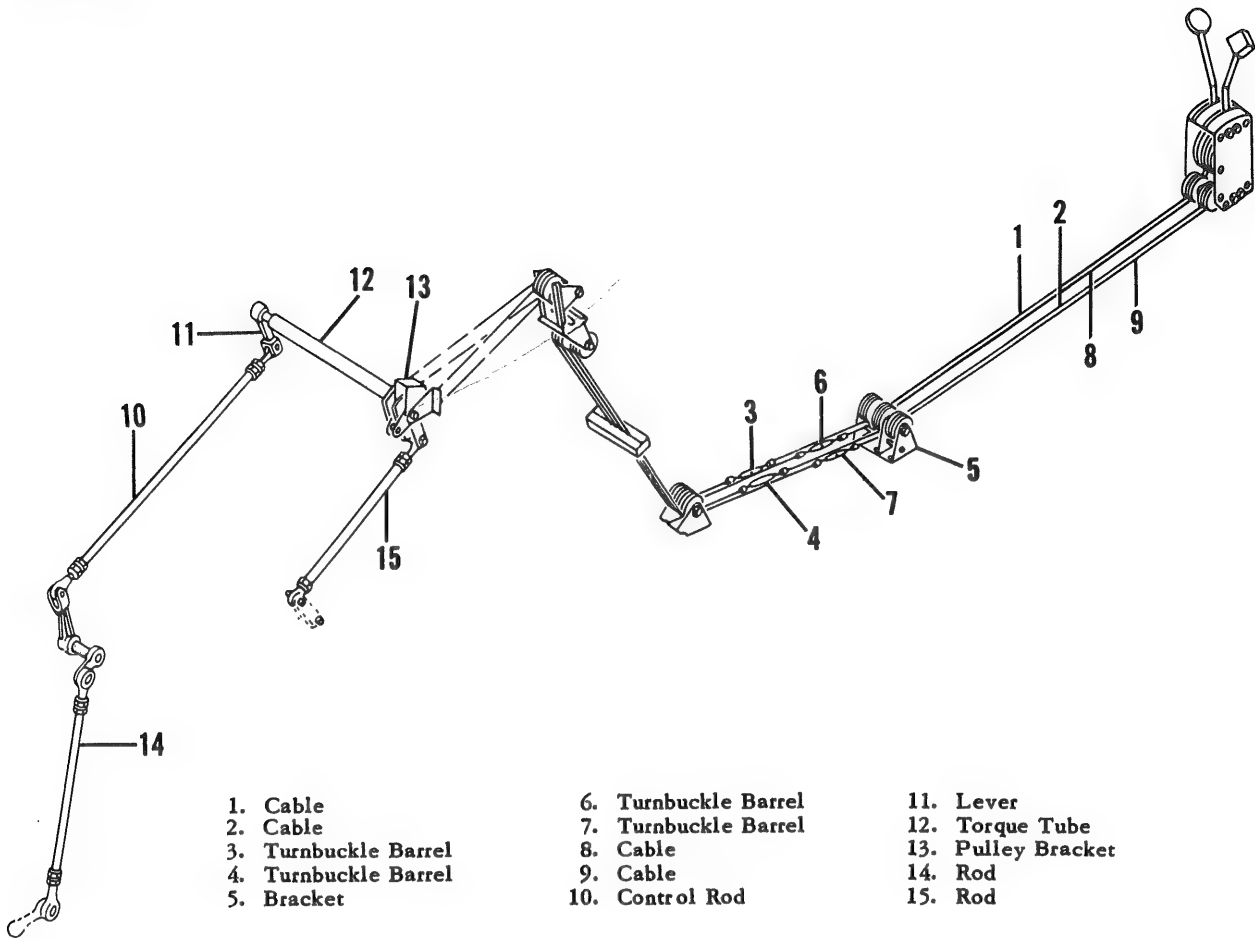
Carburetor Mixture and Carburetor Air Temperature Control System (Helicopters Serial No. Prior to 55-4462)
